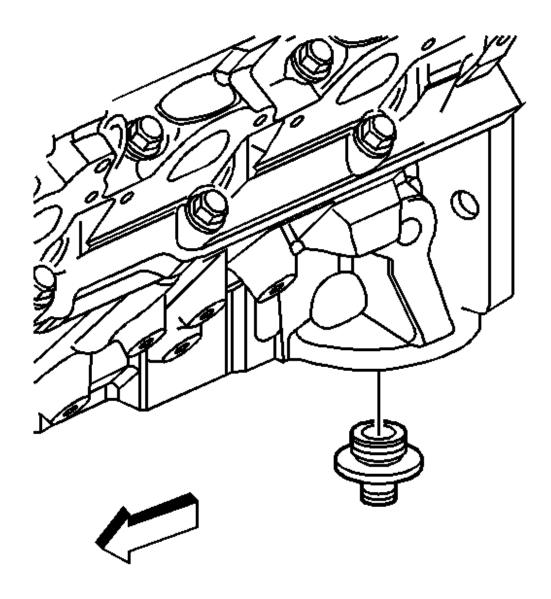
View Of Oil Filter Fitting Courtesy of GENERAL MOTORS CORP.
